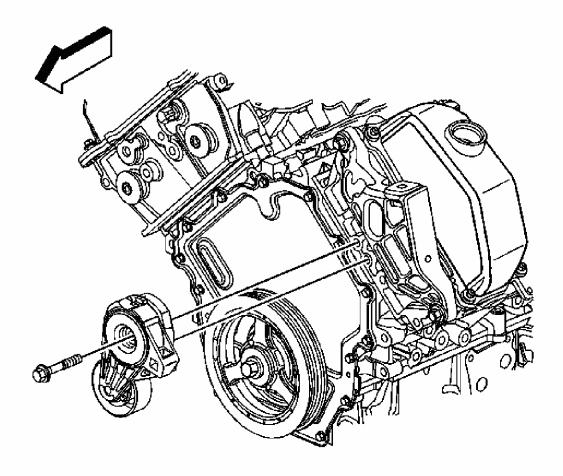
View Of Drive Belt Tensioner Courtesy of GENERAL MOTORS CORP.
